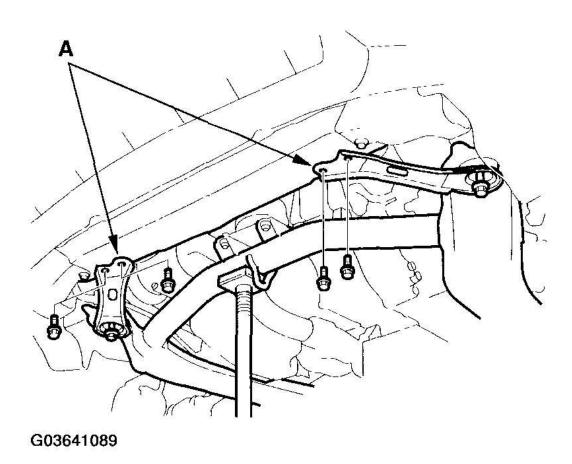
Removing Four 12 mm Flange Bolts From Front Suspension Subframe Front Brackets Courtesy of AMERICAN HONDA MOTOR CO., INC.
